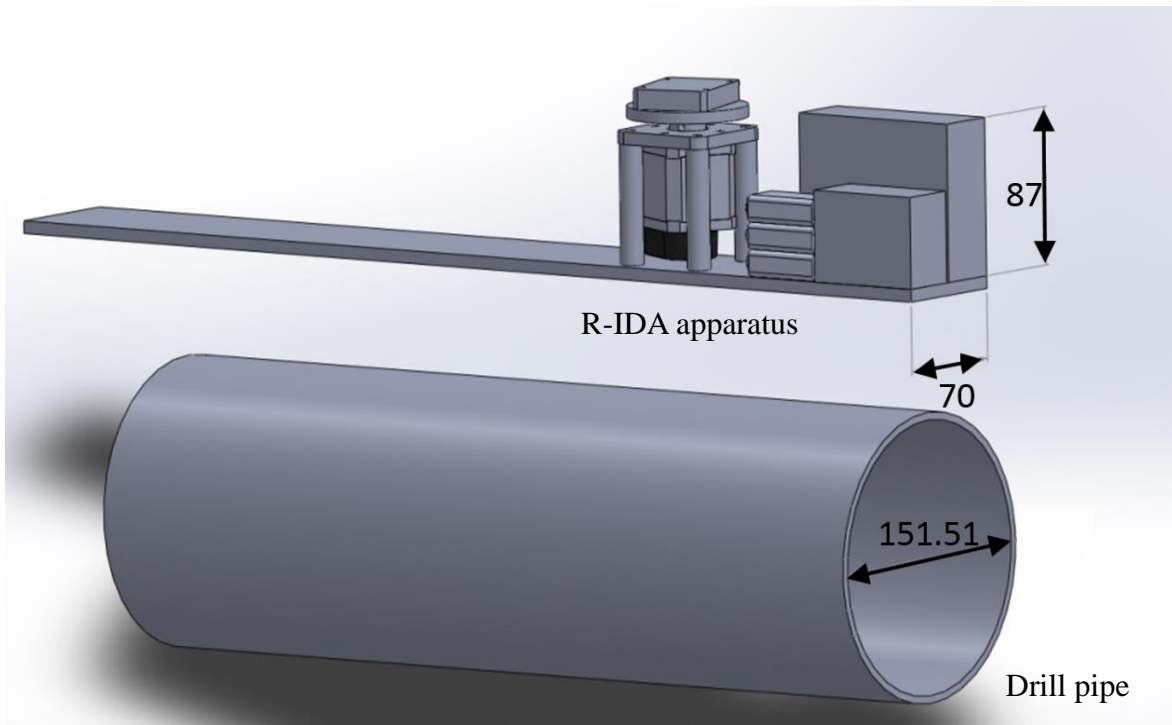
The R-IDA apparatus and a drill pipe. All dimensions are in mm.
